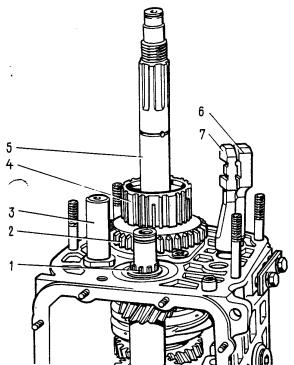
Removing Reverse Driven Gear and 5th Speed Synchronizer Sleeve Hub:
